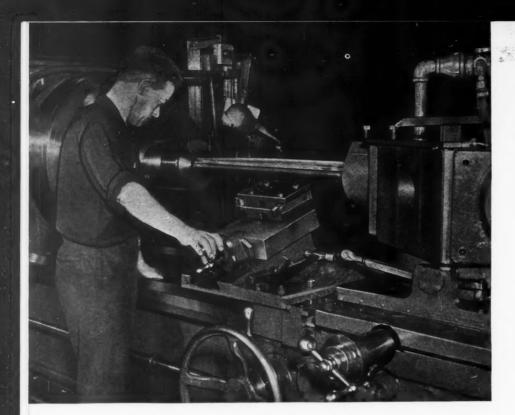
In this turret lathe setup, the breech end of the tube is faced and then bored concentric within 0.002 inch total indicator reading
